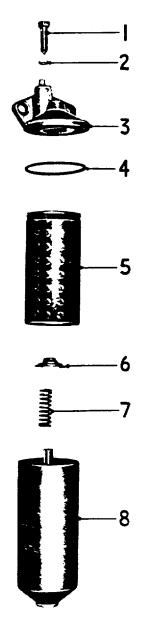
Exploded View of Lub. Oil Filter. (Replaceable element type)
